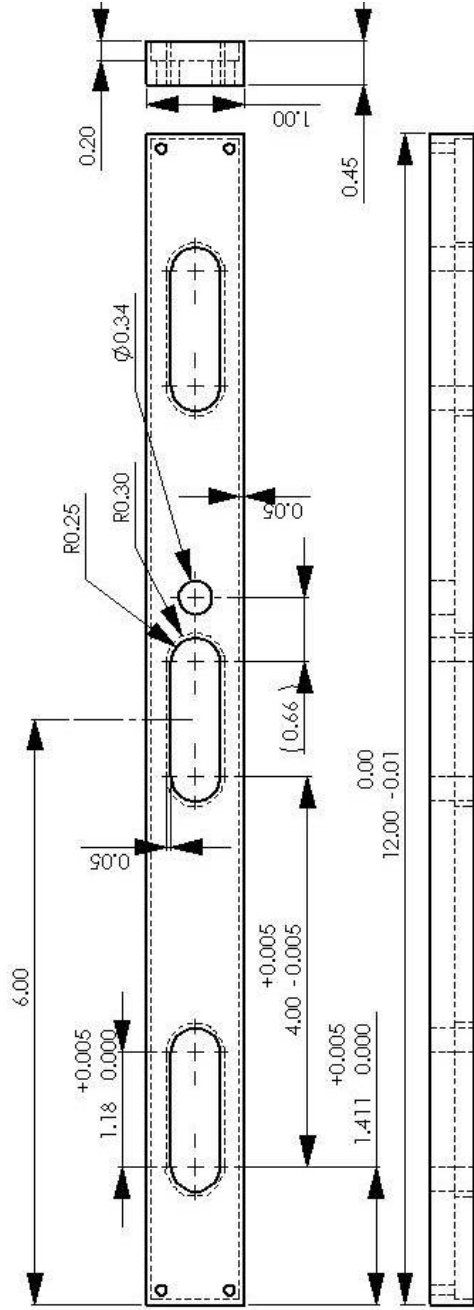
Engineering drawing for blockage configuration 4 (Third angle projection)
